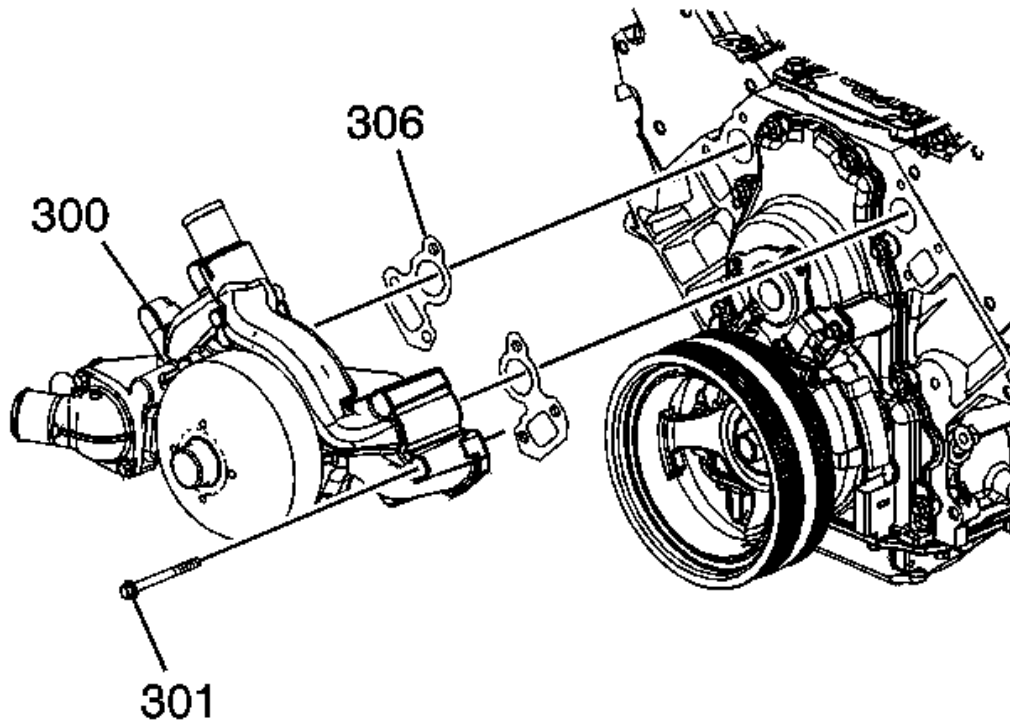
View Of Water Pump, Bolts & Gaskets
